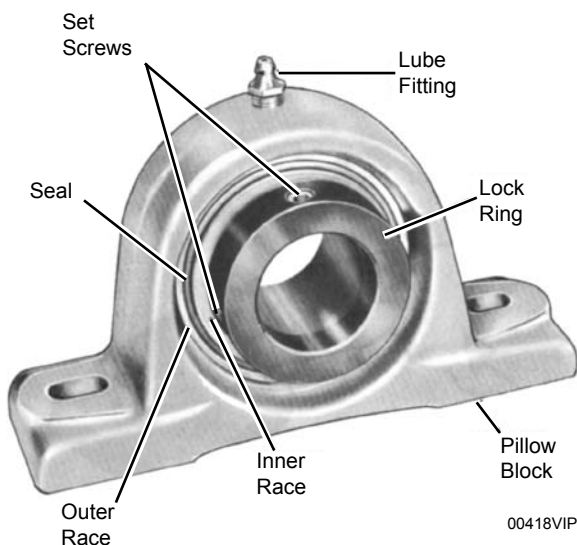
BEARING WITH SETSCREW TYPE LOCKING DEVICE
